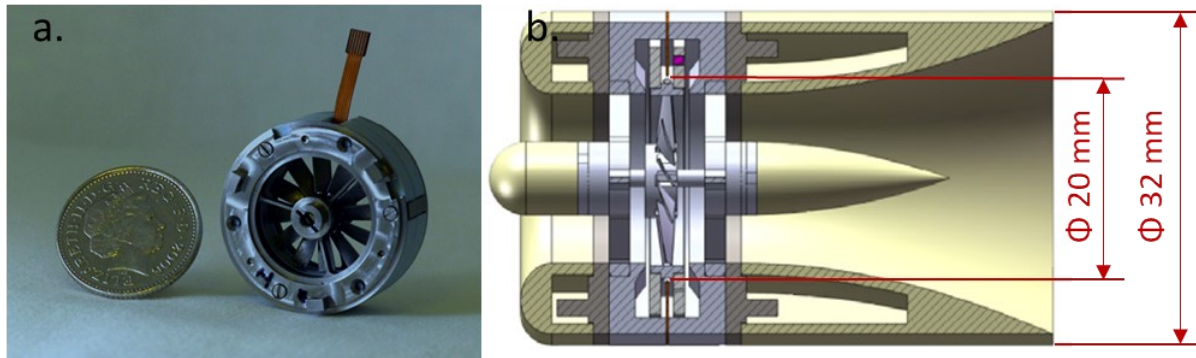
(a) Assembled Miniature Turbine and Size Comparison to a Coin; (b) Schematic of the Cross Section of the Turbine [6]
